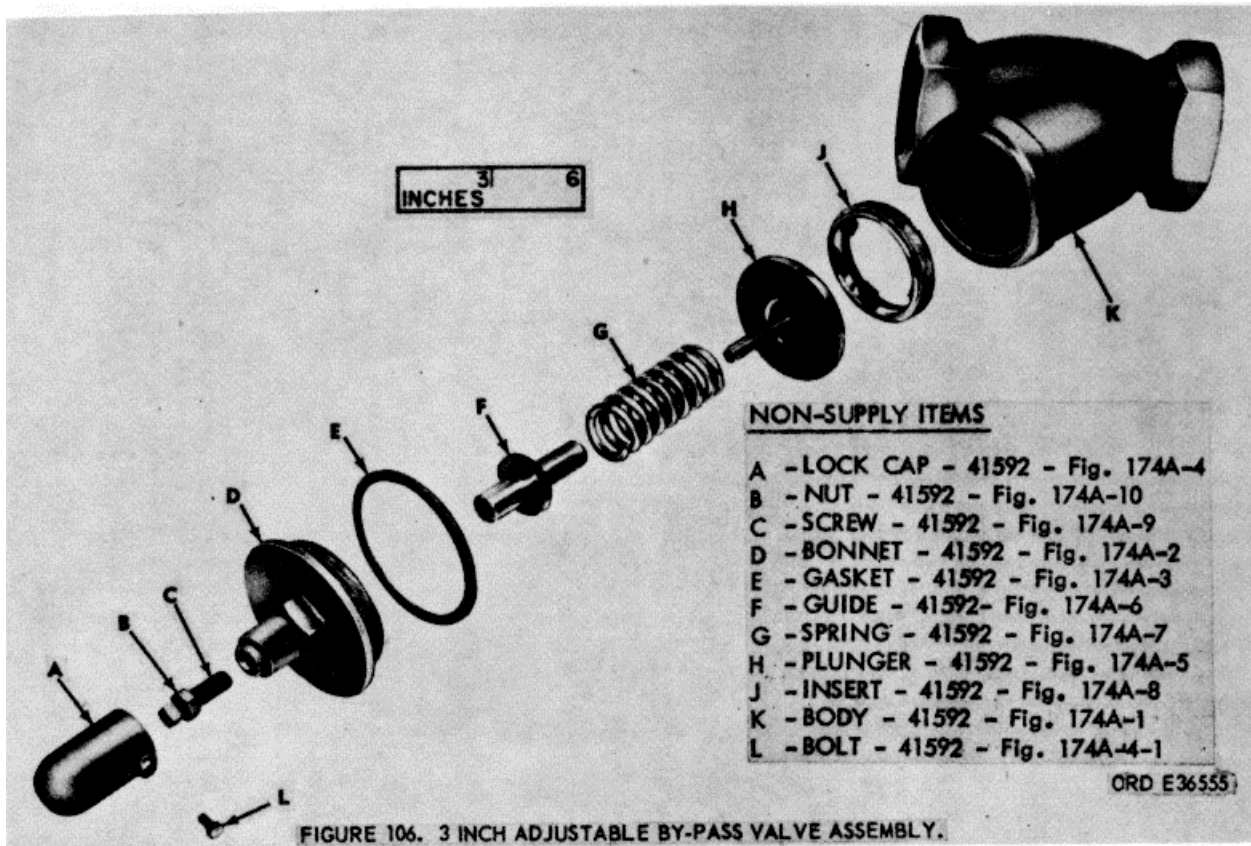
3 INCH ADJUSTABLE BY-PASS VALVE ASSEMBLY.
